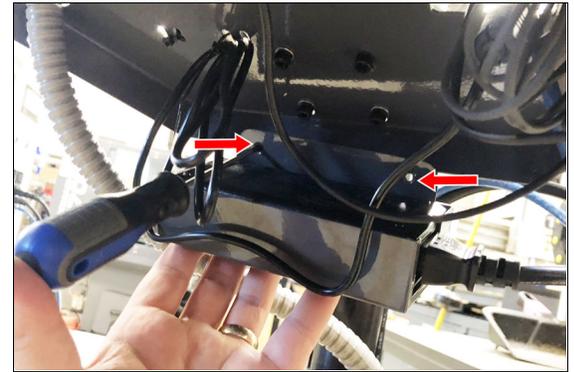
Attaching the operator console's power supply and power supply bracket to the keyboard tray (from below).
